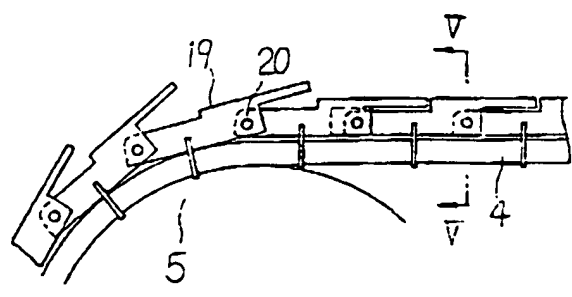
is a side view, partly in longitudinal cross section, showing an embodiment of the apparatus for caring for the inside of a gun barrel according to the present device; Fig. 2 is an enlarged front view in cross section of the part of an oil hydraulic motor; Fig. 3 is a side view in longitudinal cross section of that part; Fig. 4 is a side view showing support fittings of a cleaning hose; Fig. 5 is a front view in cross section taken along the line V-V of Fig. 4; and Fig. 6 is an illustrative view showing the
